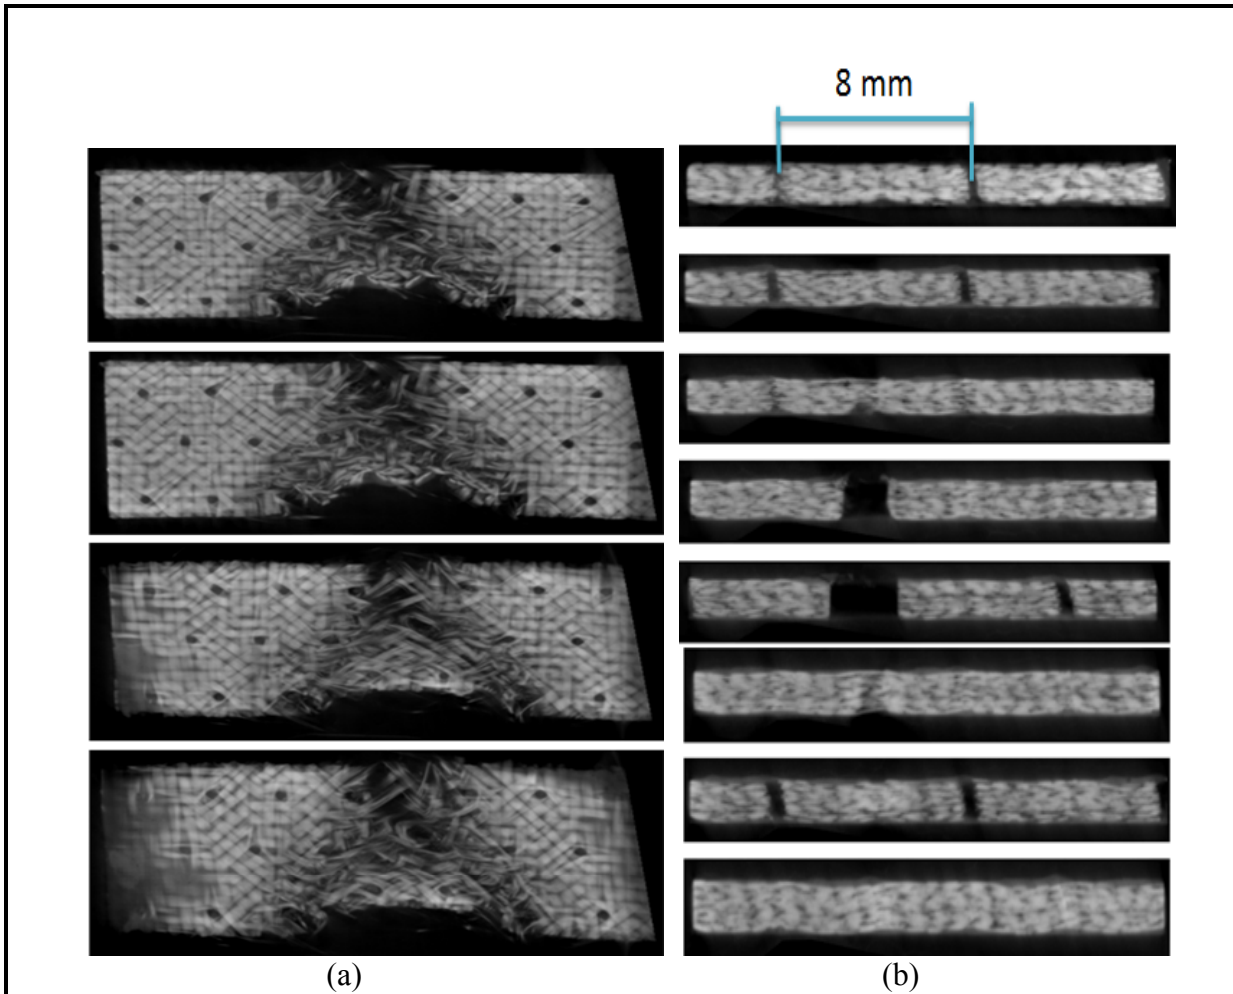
Reconstructed 2D images of fractured specimen in static tension test (a) Top surface (b) Side view of open-hole sample with dimensions of 20 mm x 25 mm
